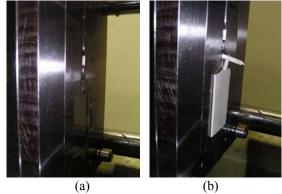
Injection mould (a), and an injection moulded HA/PHB composite plate in the mould (b)
